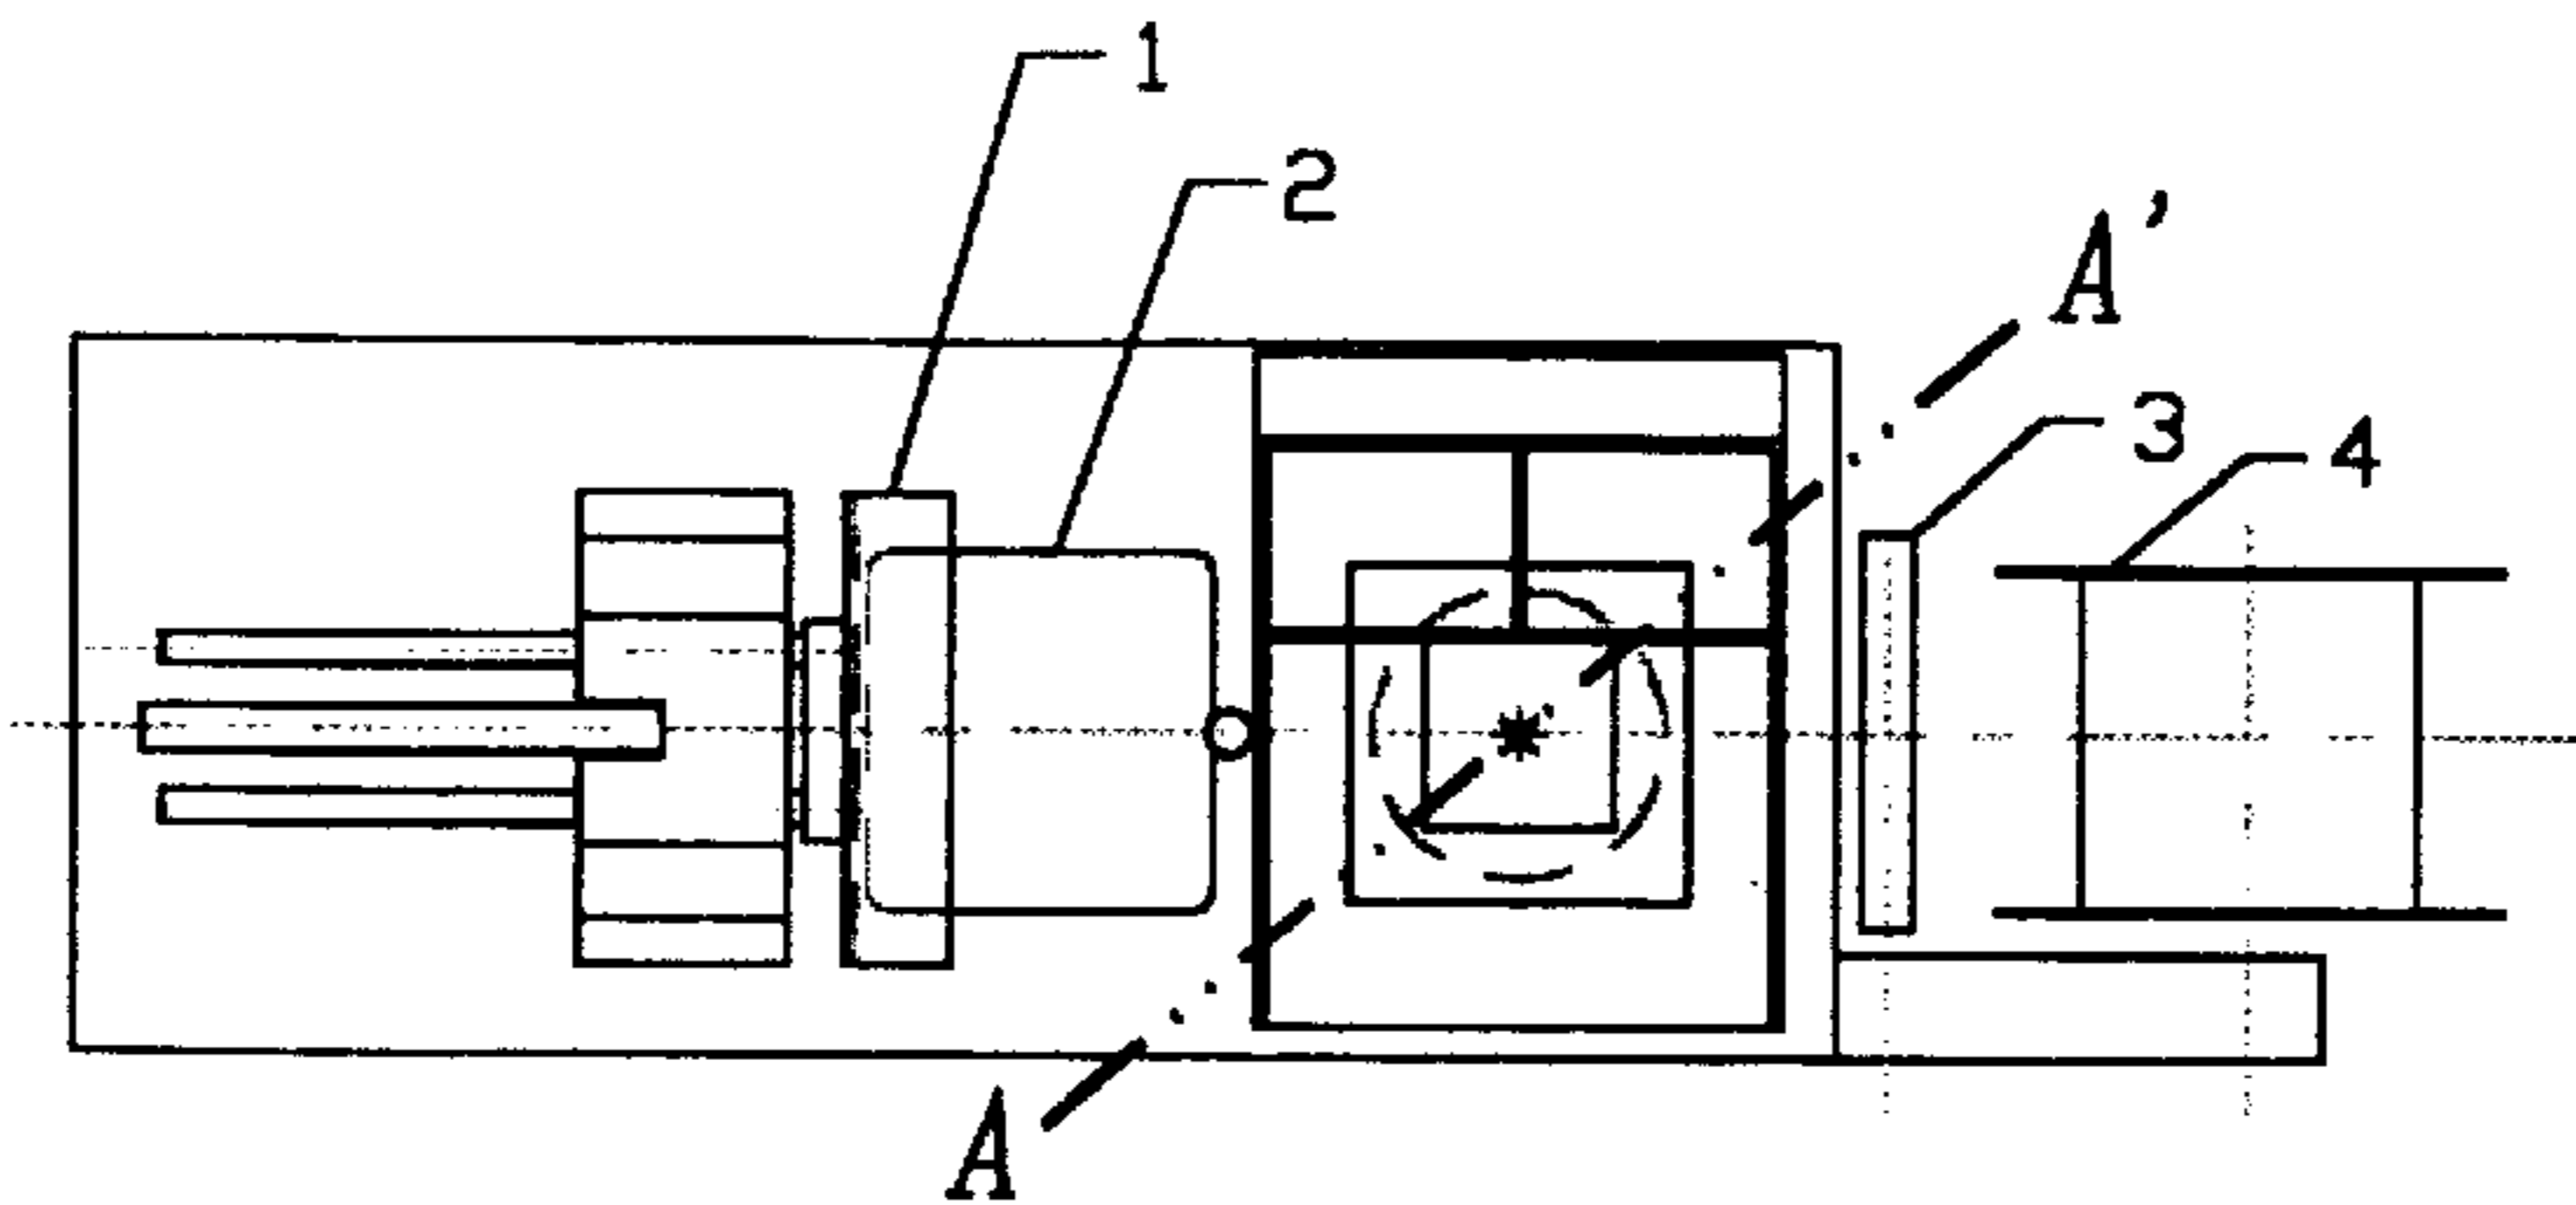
PLAN VIEW & CROSS SECTION LOCATION
